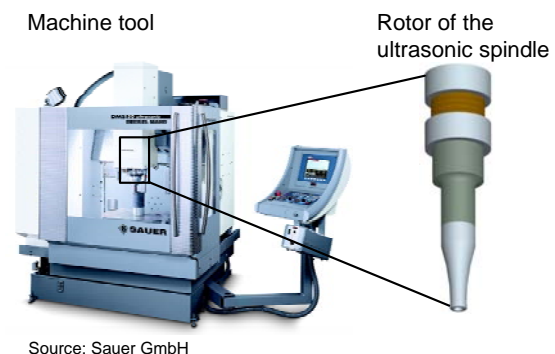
Ultrasonic assisted grinding machine DMS50 ultrasonic from Sauer GmbH.
